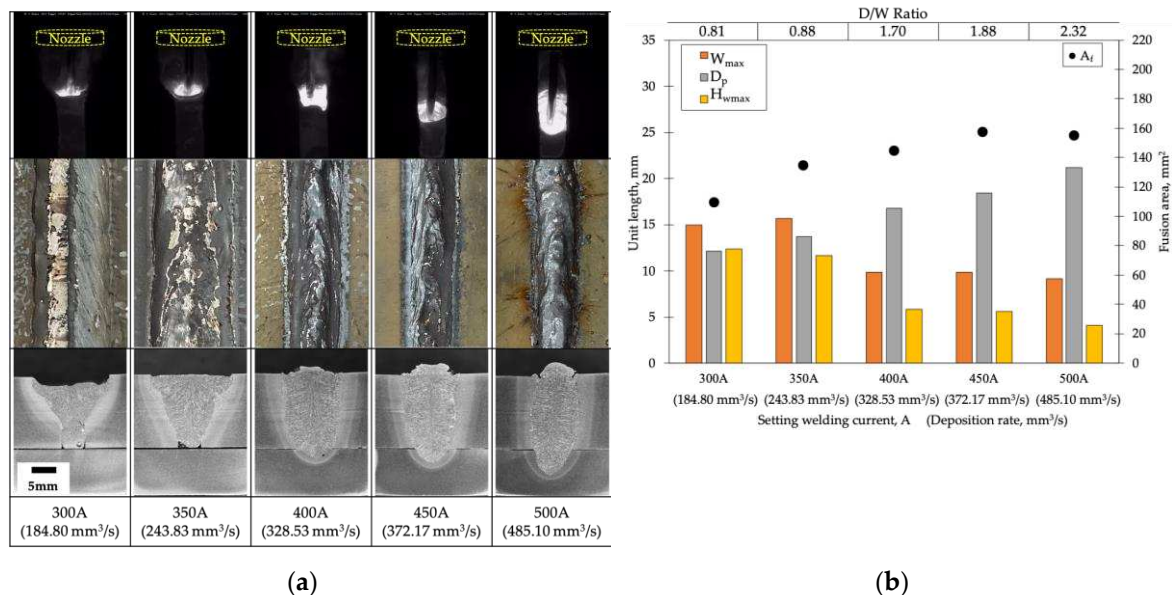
Effect of the welding current in solo GMAW for a 5-mm gap and a welding speed of 30 cm/min: (a) arc behavior, weld bead appearance, and cross-sectional analysis and (b) weld profile measurement.
